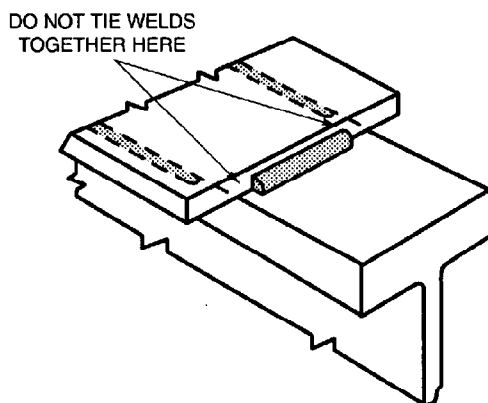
Fillet Welds on Opposite Sides of a Common Plane of Contact (see 2.4.7.5)
